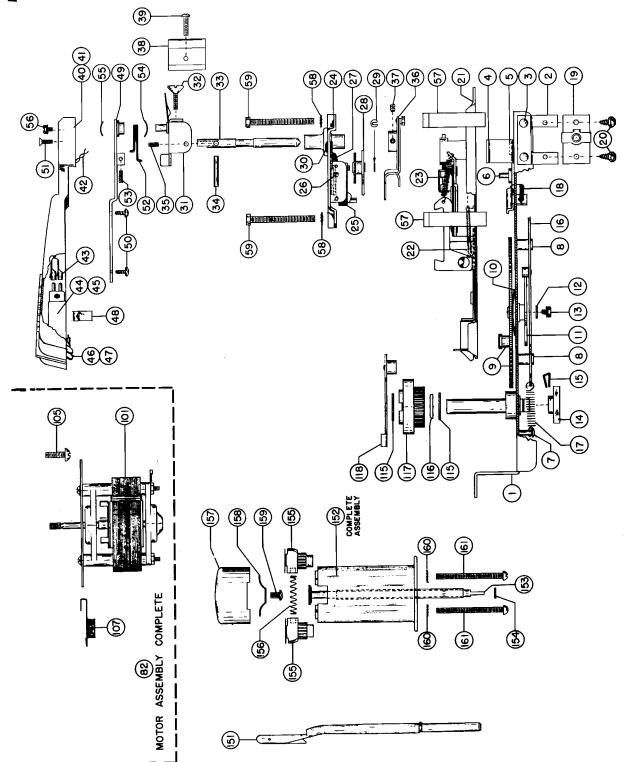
MOTOR & SPEED CHANGING ASSEMBLY
